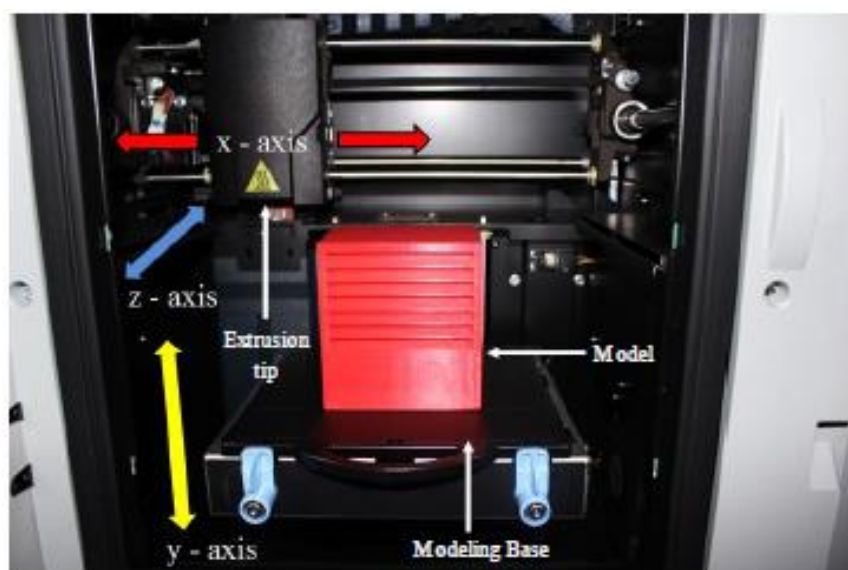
Printing bay of HP Designjet 3D Printer [170]
